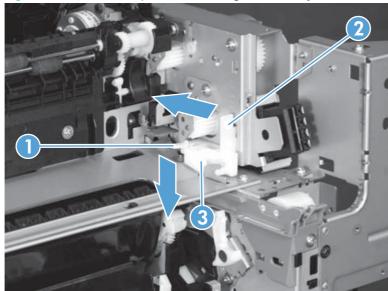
Install a replacement fuser gear assembly (2 of 3)
